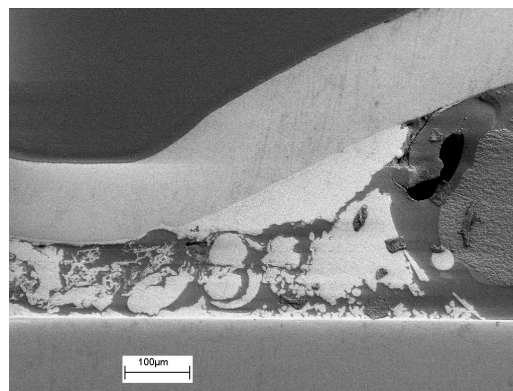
An Ag3.5-Sn96.5 dimple solder joint after more than 35,000 power cycles.
